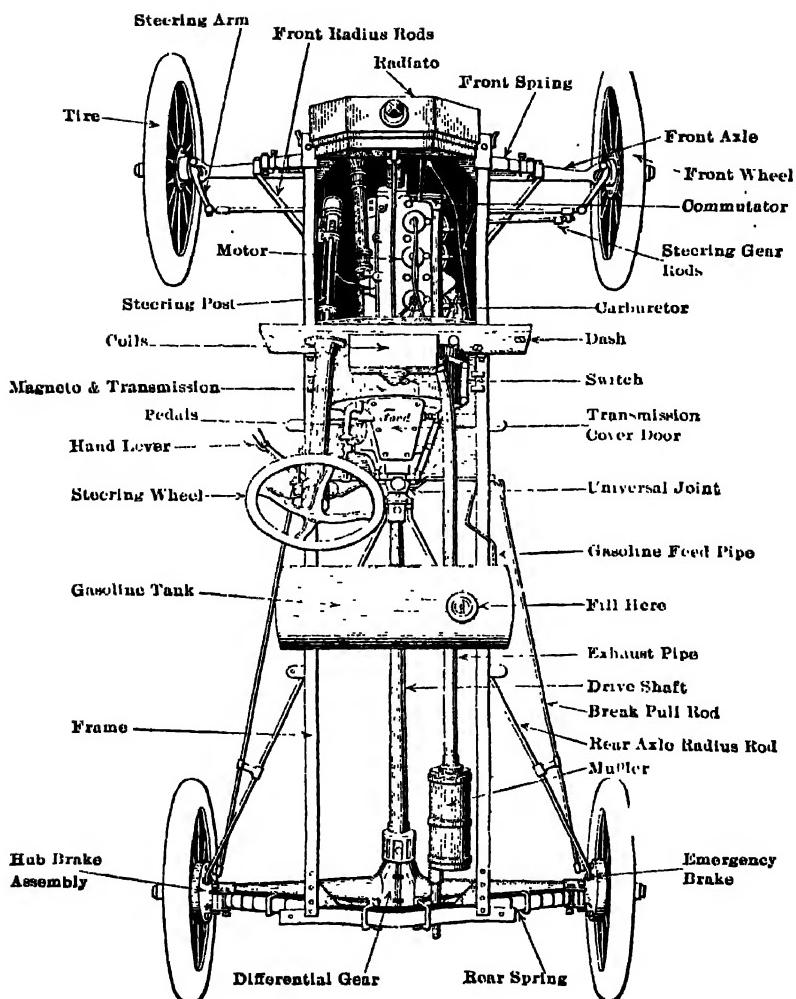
Plan View Showing Location of Chassis Components of Ford Model T Car.
